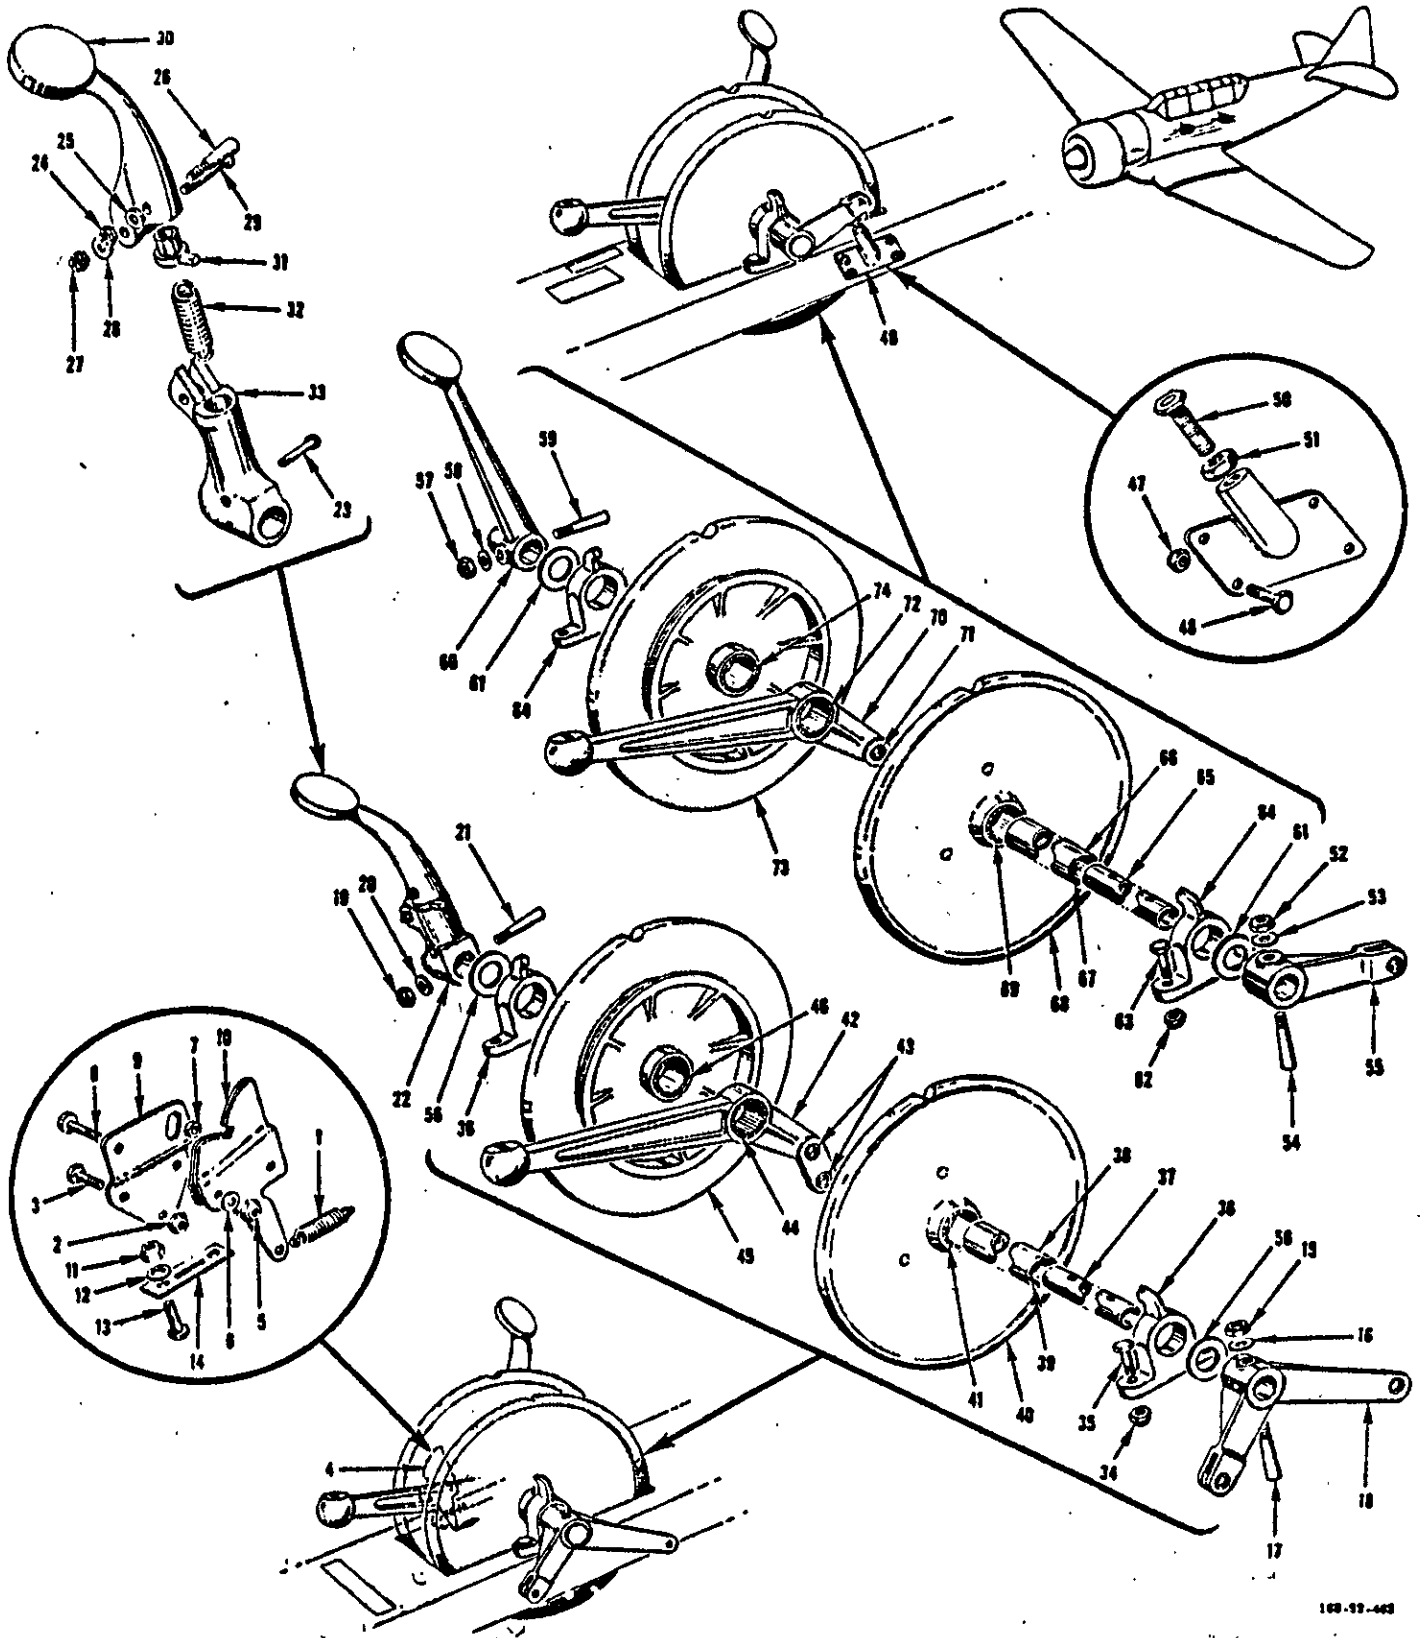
CONTROL SHELF CONTROL EQUIPMENT
